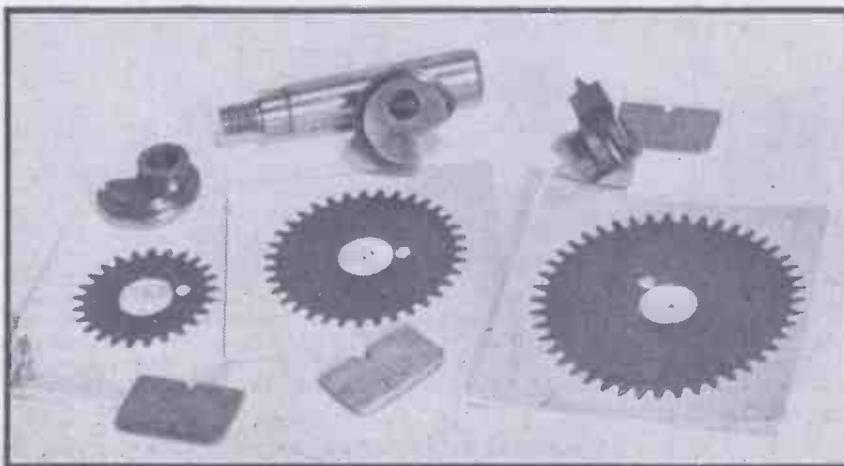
Photographs, with templates and cutters derived from them, and arbor for cutters.
